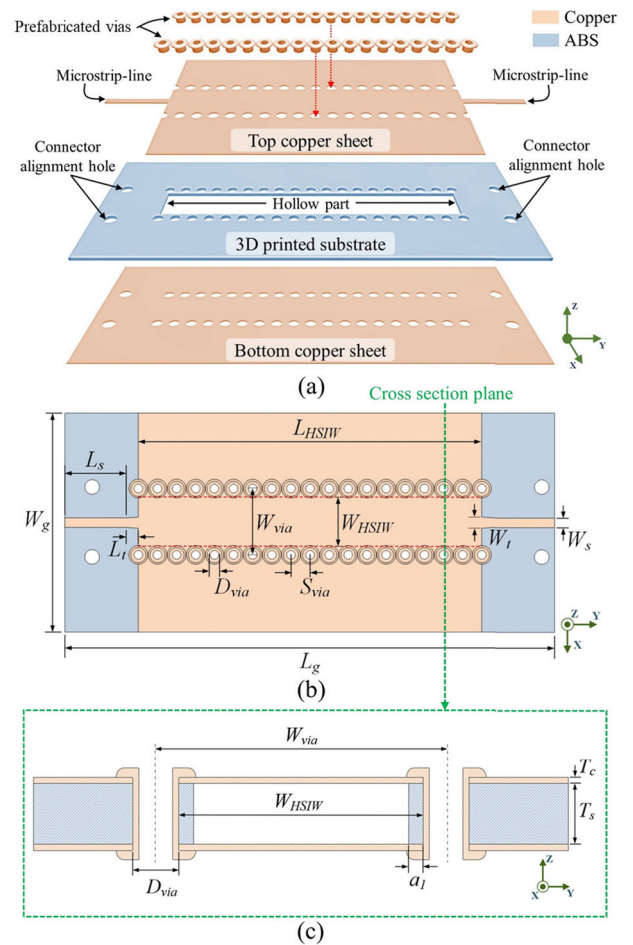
Schematic diagrams of the novel HSIW in this paper: (a) 3D exploded view, (b) top view with all design parameter, and (c) cross-sectional view of the HSIW.
